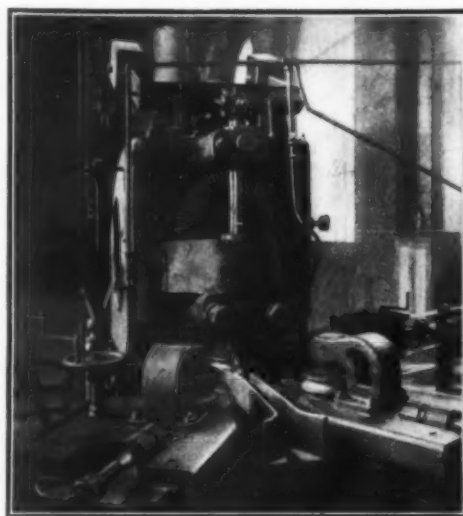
ROLLING MACHINE FOR THE MANUFACTURE OF WELDLESS CHAINS.
